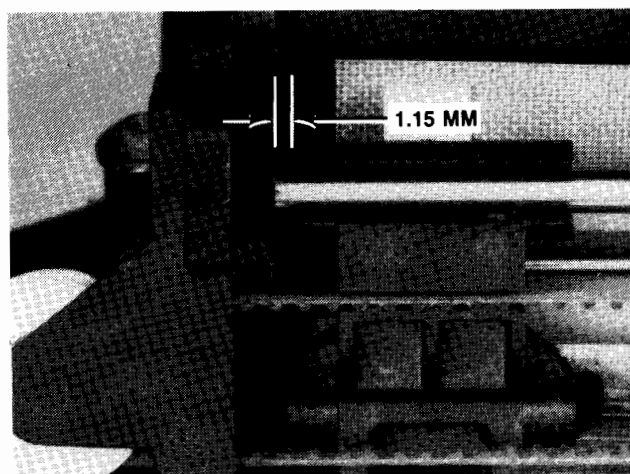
Clearance Between Print-Head Carriage and Bumpers
